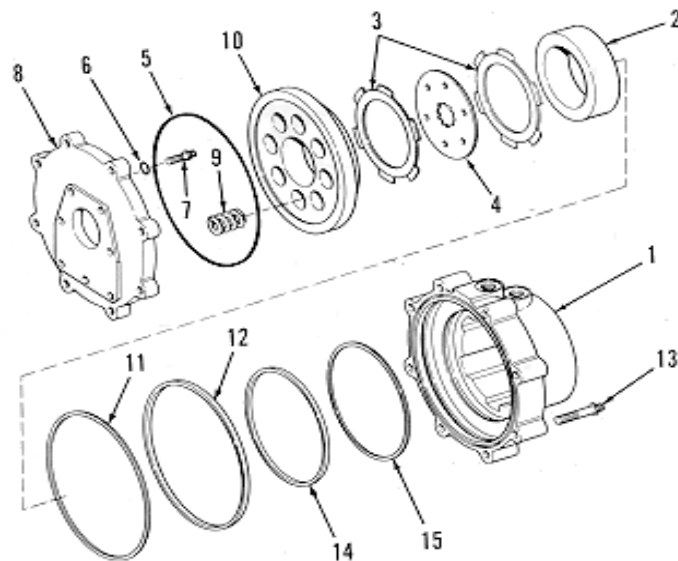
EXPLODED VIEW RSA, RSB AND RSC SERIES BRAKE
